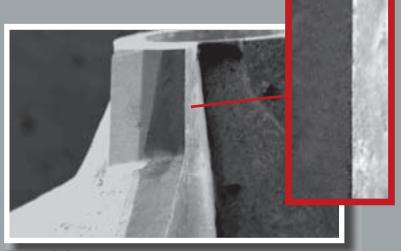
PCD tool Convincing, wear-resistant diamond cutting edge
